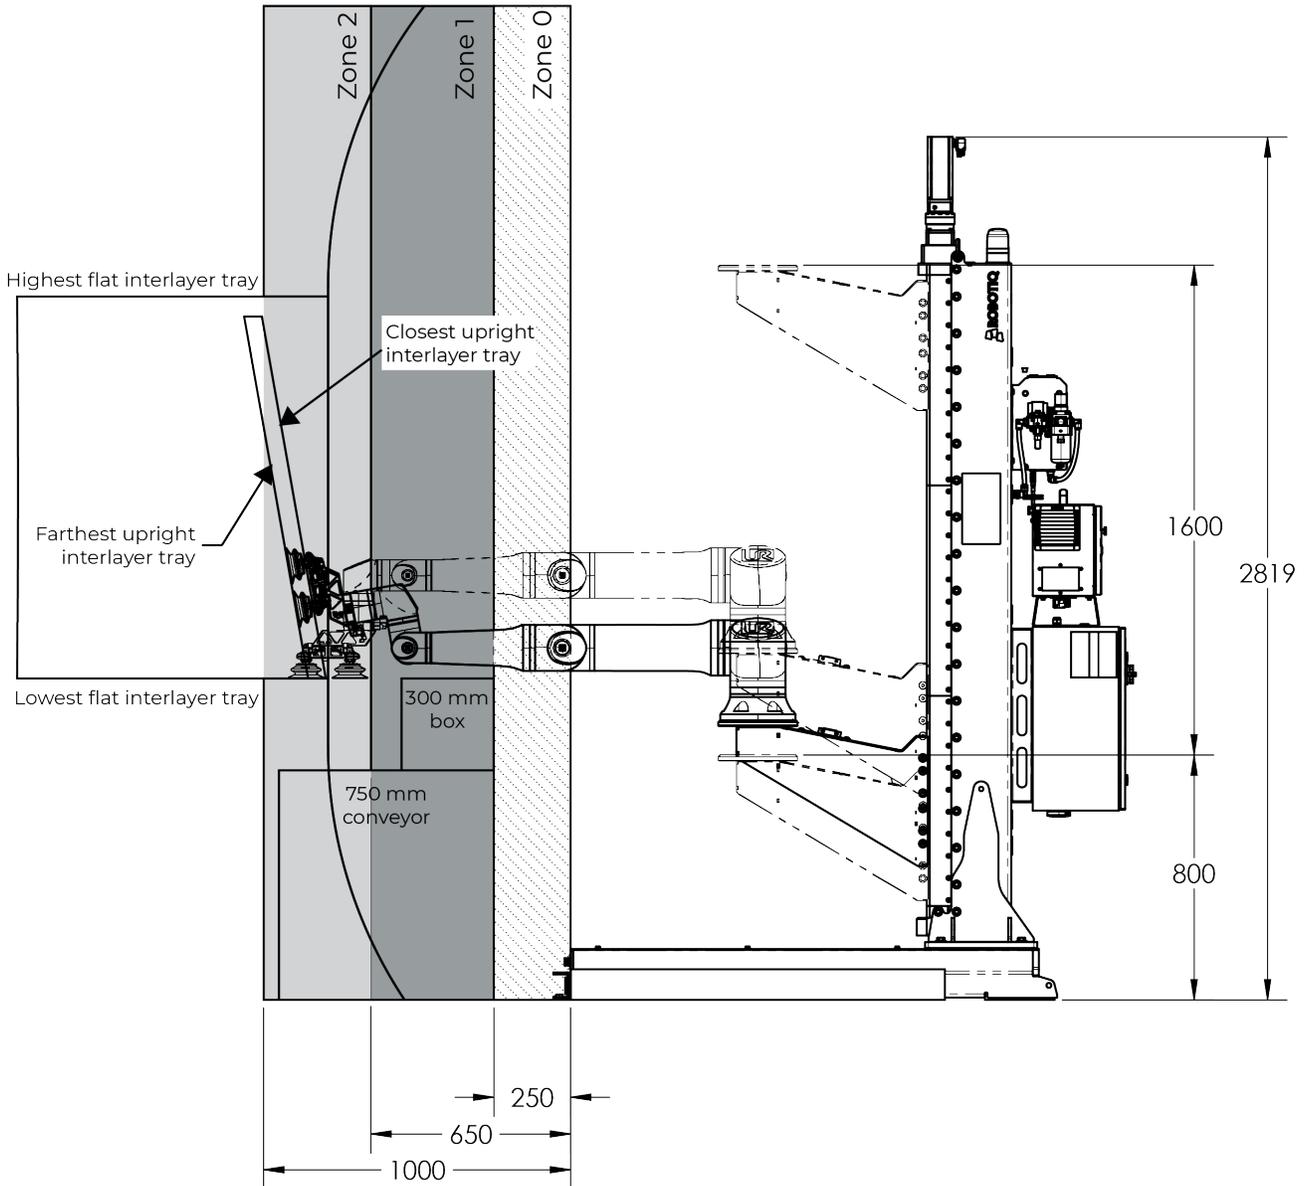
AX30 Palletizing Cell Layout - Side View
